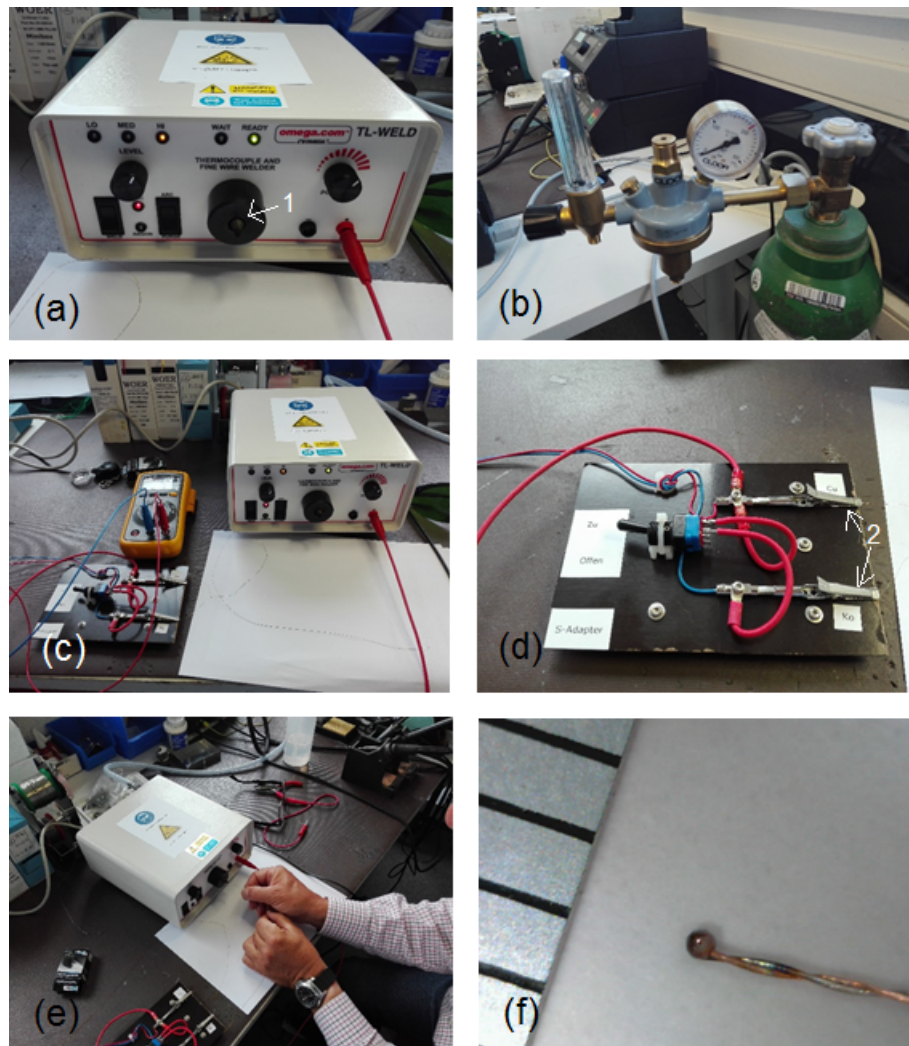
(a) Point welding machine; (b) Argon gas bottle and dispenser; (c) point-welding set-up; (d) in-house (mylab) made short circuit for thermocouple welding; (e) thermocouple point welding technique; (f) welded \varnothing 0.1 mm thermocouple.
